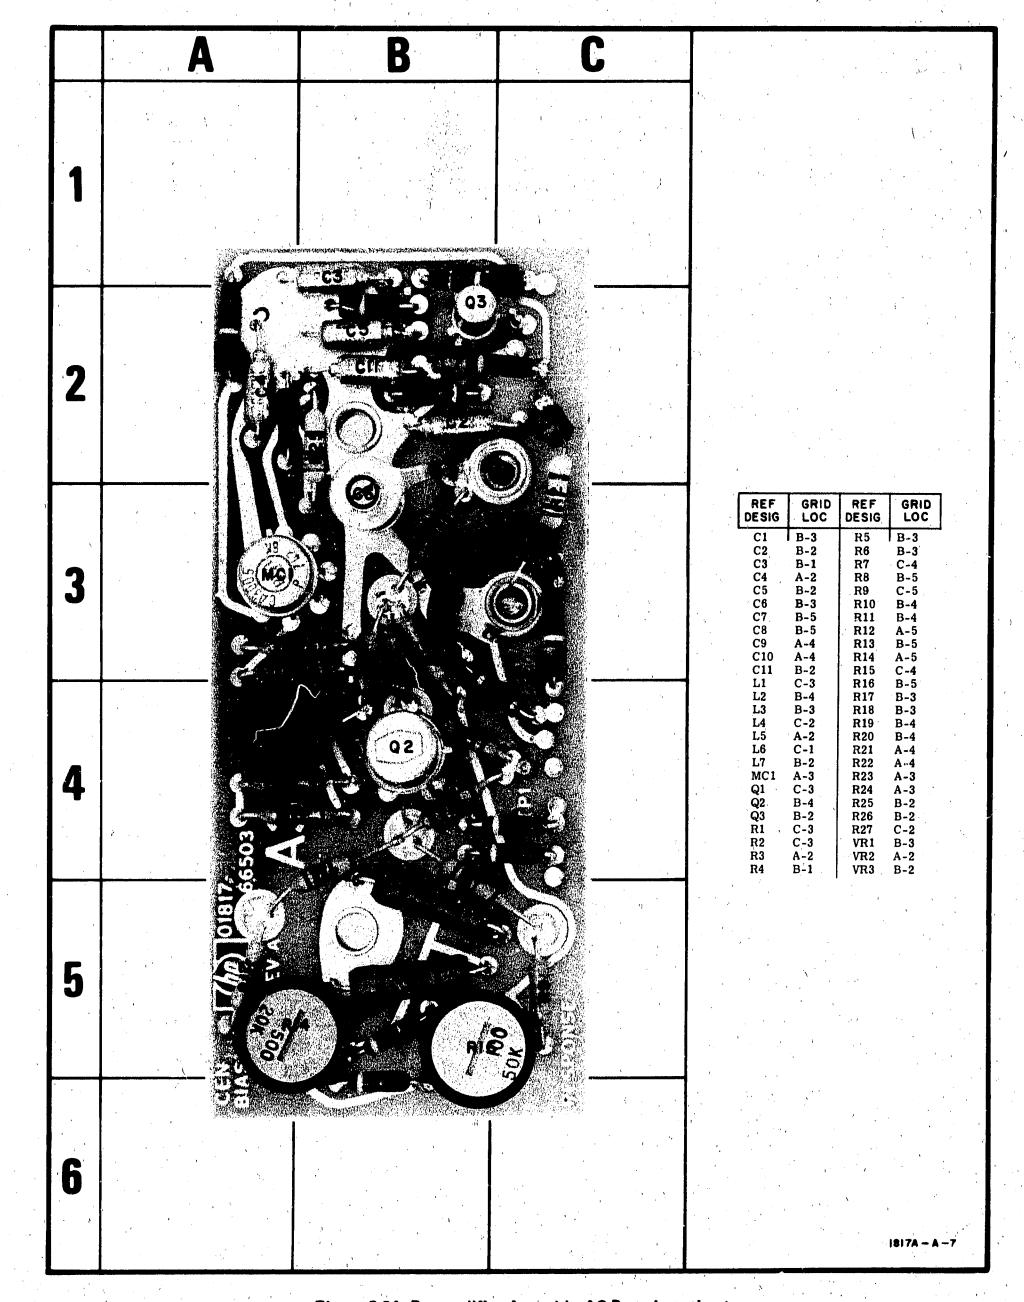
Preamplifier Assembly A3 Parts Locations
